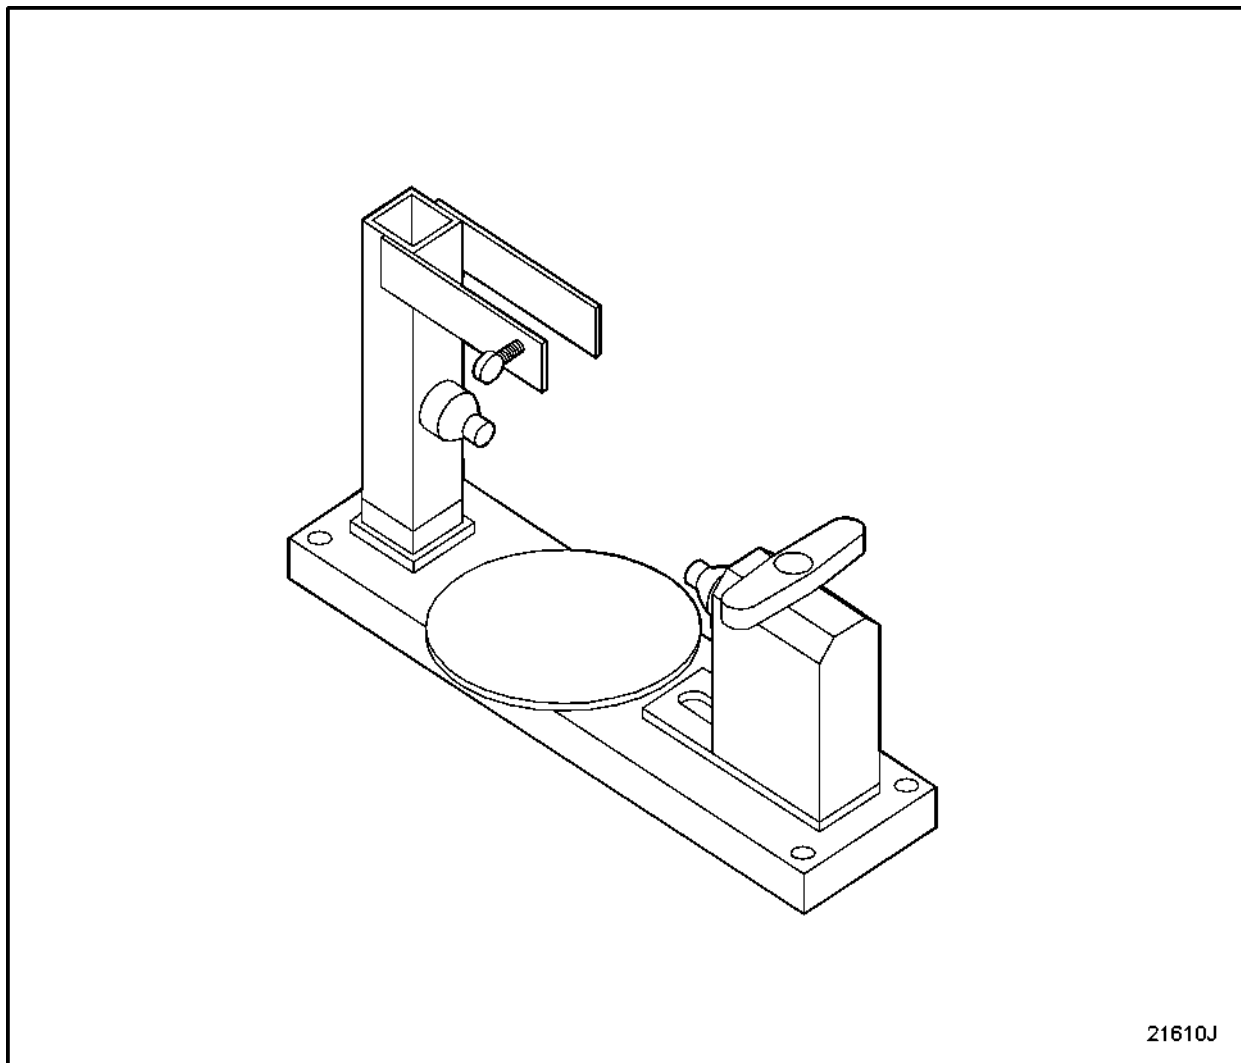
Piston/Conn Rod Holding Fixture,J 36211
